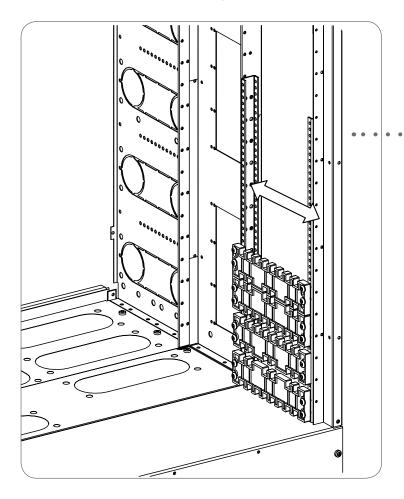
Fastening E-serie support insulator assemblies, using screws to fasten assembly to frame plate and back profile.
